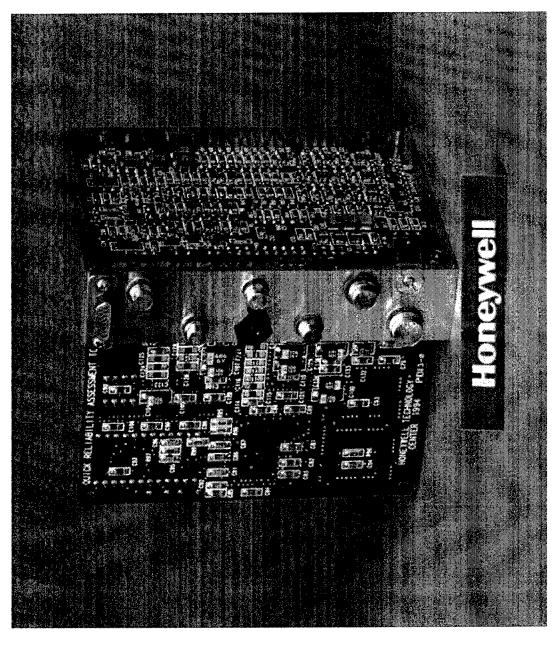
Photo of Quick Reliability Analysis Tool Sensor and Electronics Package showing how the two printed circuit boards fit into the Sensor and Electronics Package. One of the three internal accelerometers can be seen in the lower right corner of the front connector face.
